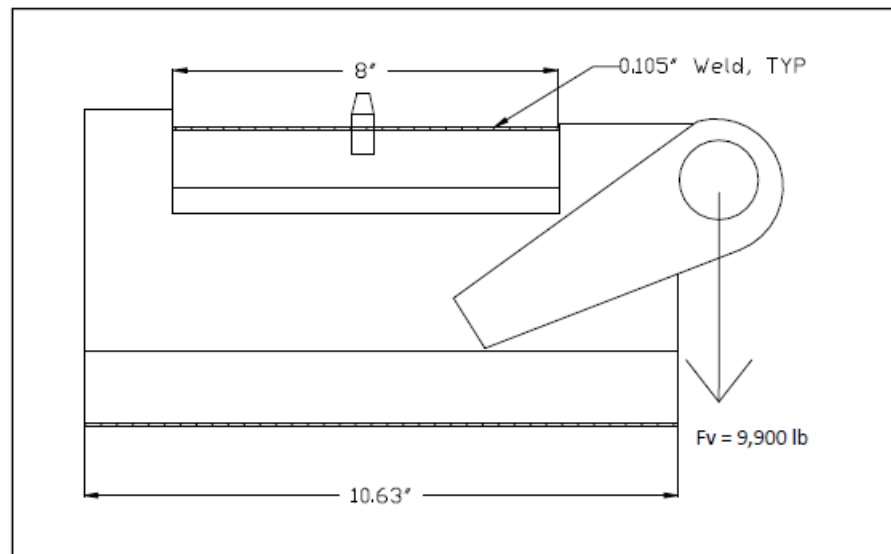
Vertical Lift Eye Welding Configuration
